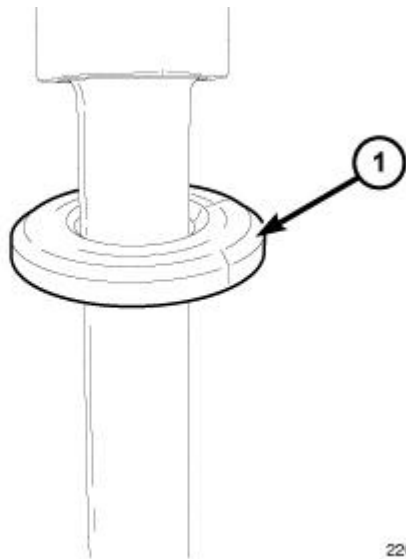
Washers Must Be Installed With Bevel Edge Up Towards Bolt Head
